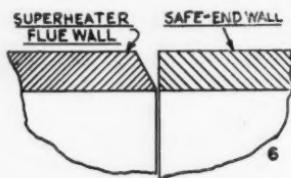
Cross-section drawing showing safe-end wall and superheater flue aligned for welding.
